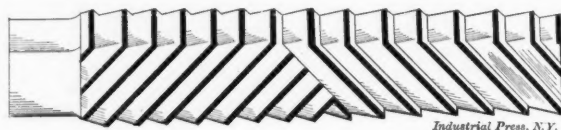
Type of Broach used for Finishing the Holes for the Wedges and Jaws in the Chuck.
